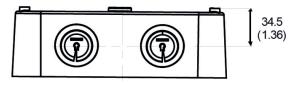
A5xx Controller top view with dimensions in millimeters (inches)
